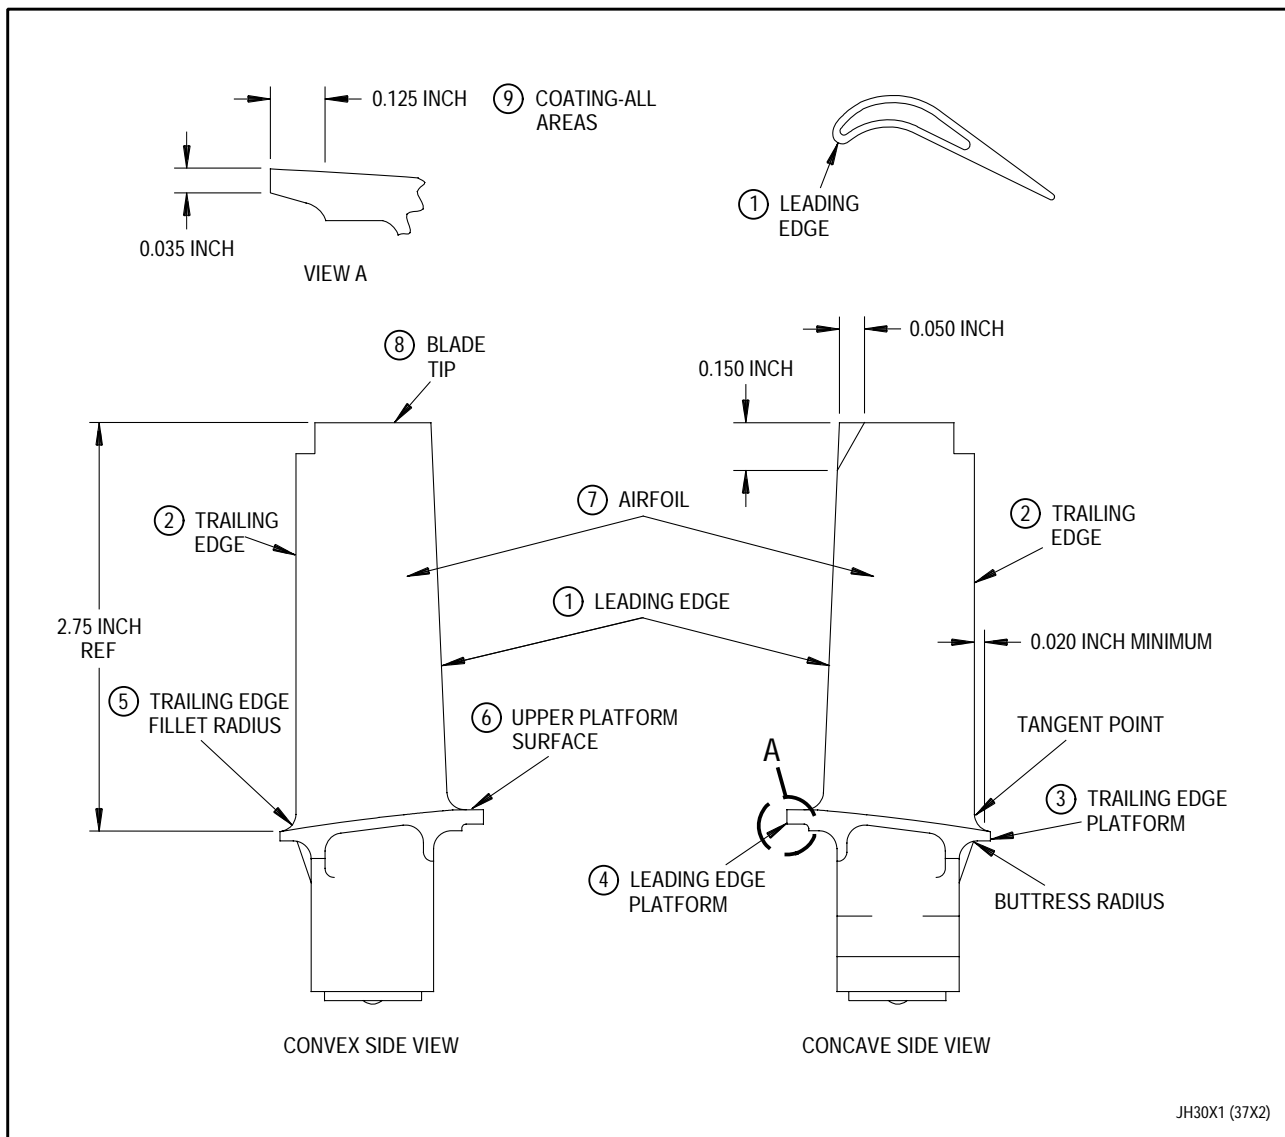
Second Stage Turbine Rotor Blades - Inspection
